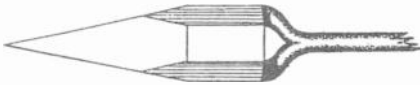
(B) An incorrectly shaped soldering iron tip. The point is too long and narrow and will neither hold nor conduct heat to the surface to be soldered satisfactorily.
